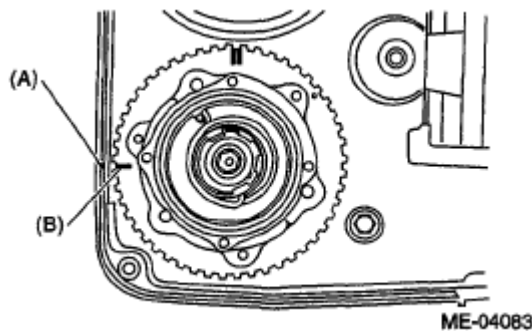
Identifying Single Line Mark (B) On Intake Cam Sprocket RH And Notch (A) Timing Belt Cover
